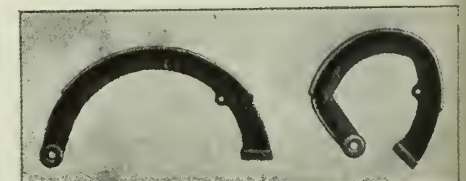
EXAMPLE OF ABUSE MALLEABLE CASTINGS WILL WITHSTAND
